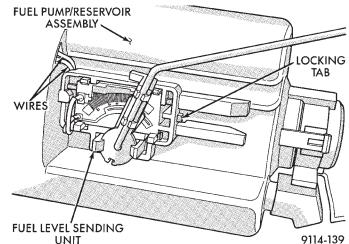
Fuel Level Sensor—Front Wheel Drive
